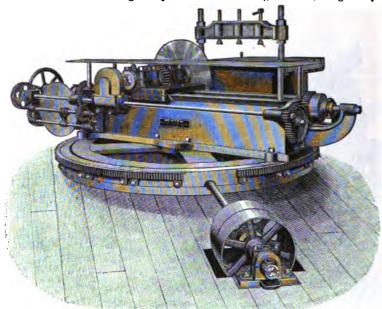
Cold saw cutting-off machine built on revolving bed.
